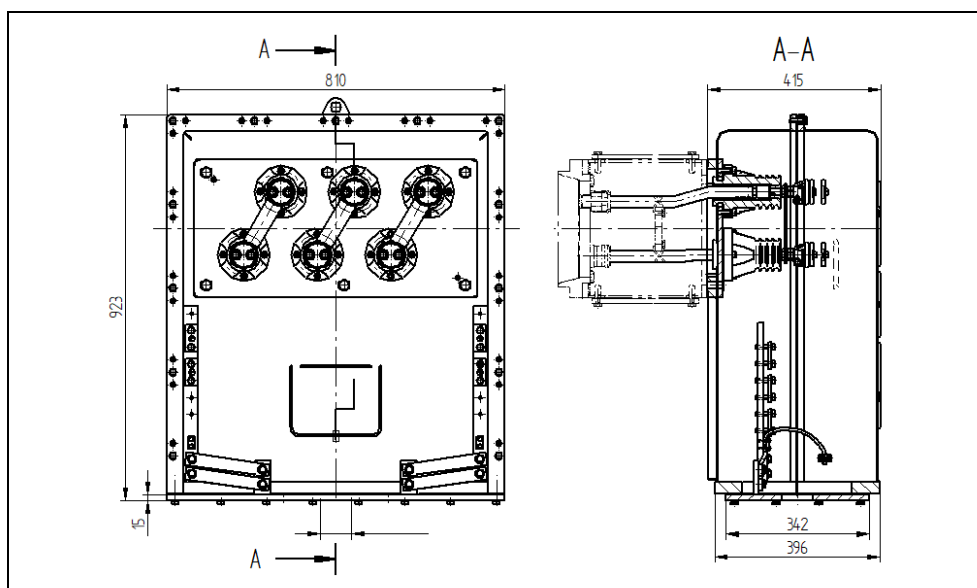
Standard terminal box 9-103 732.61 (11 kV)
